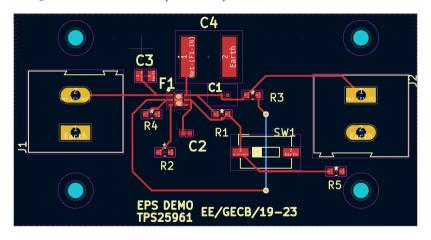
PCB Layout of protection circuit (55mm x 28mm)
